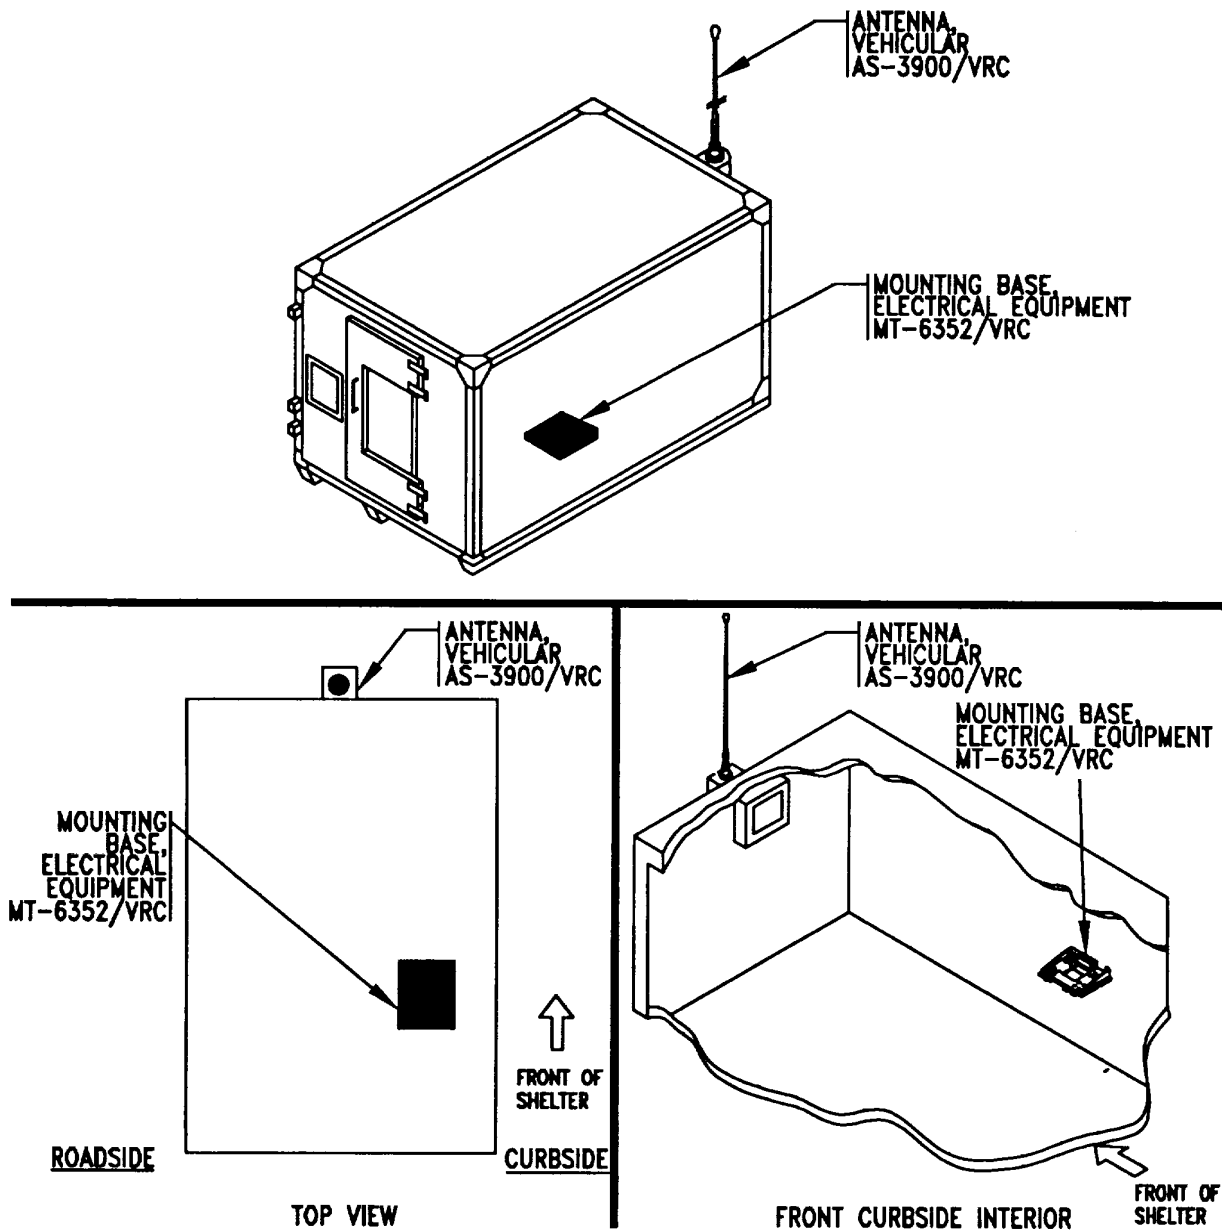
(1). MK and Radio Installation: Mk Equipment Locations
